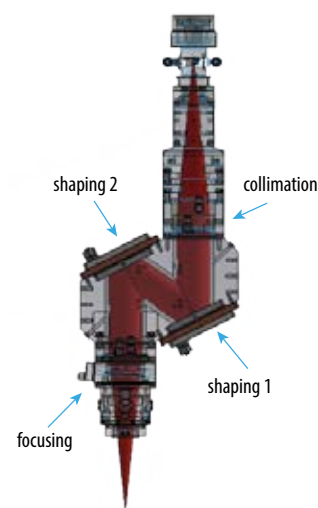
Schematic of the laser head principle used to weld copper
